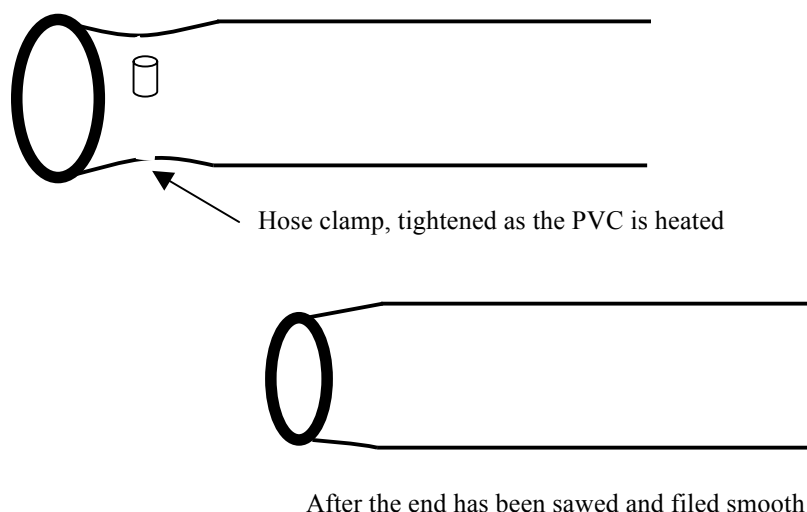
Showing how to construct a mouthpiece by squeezing the end of the PVC pipe.
